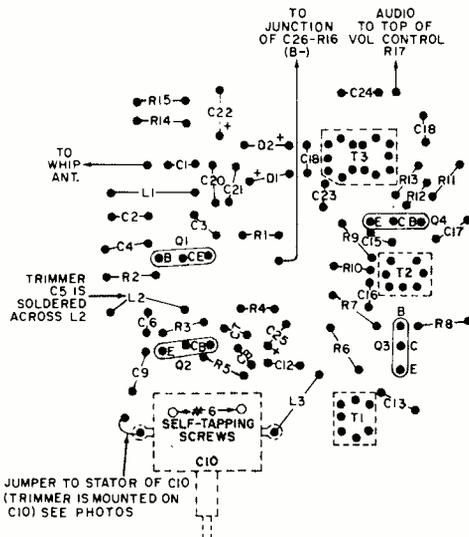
When mounting capacitor *C10* on board, make good electrical contact between frame and foil.
